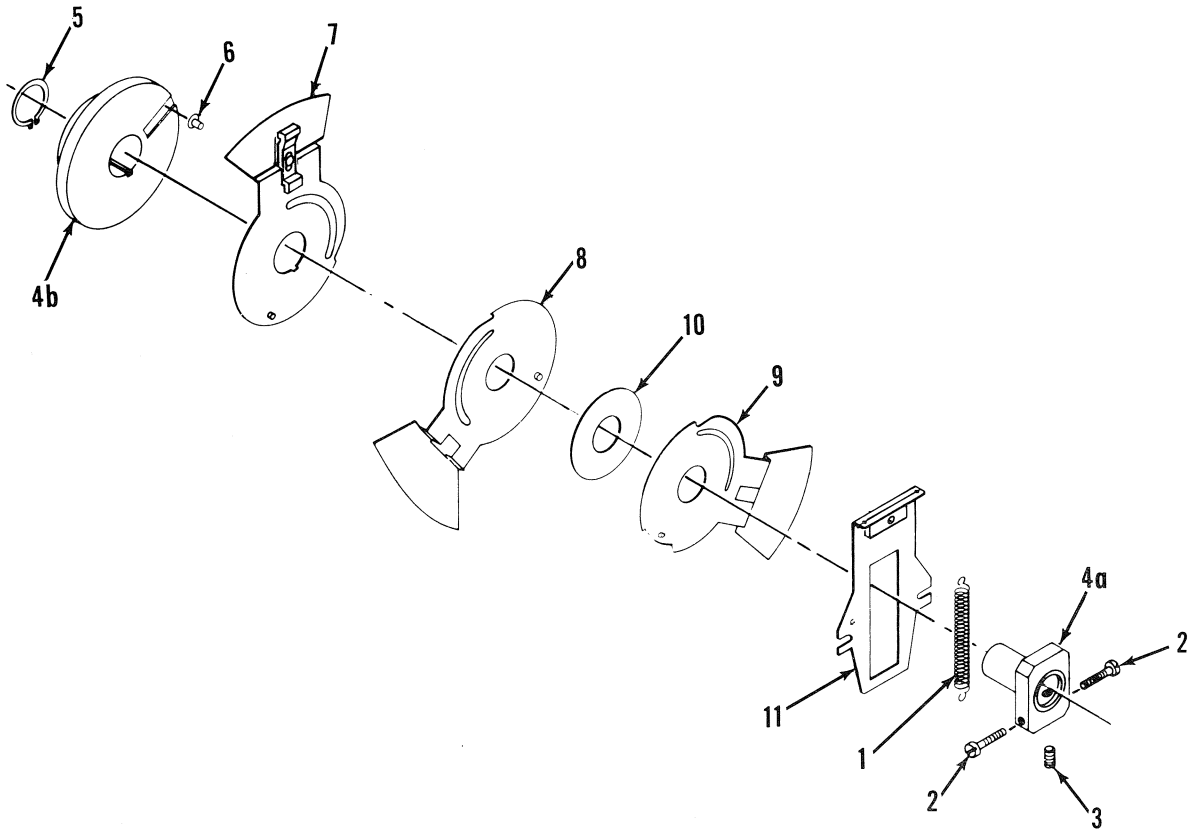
SHUTTER AND CAM ASSEMBLY
